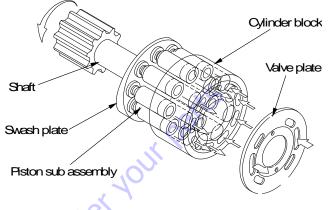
Structure of Swash Plate Type Axial Piston Motor
